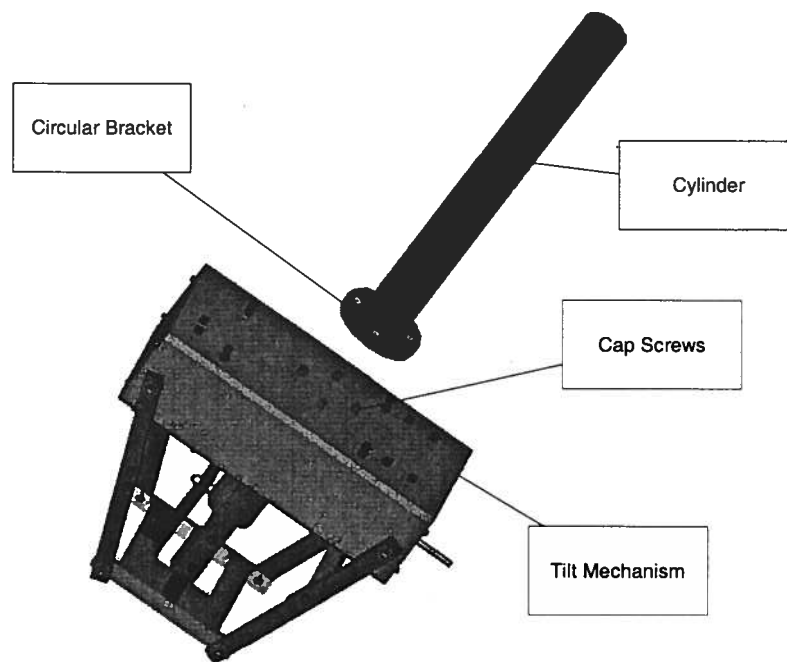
Tilt Mechanism/Cylinder Interface
